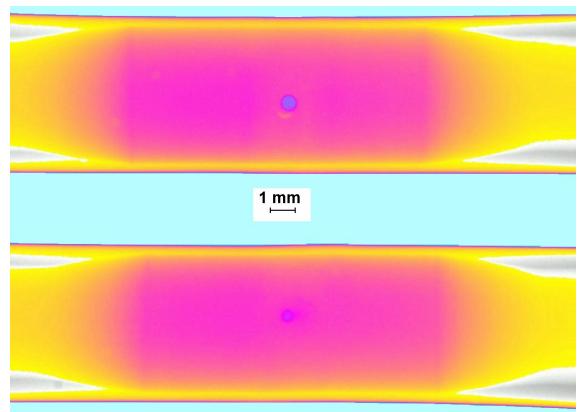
Digital X-ray image (reduced thickness welded tubes with reference holes).
